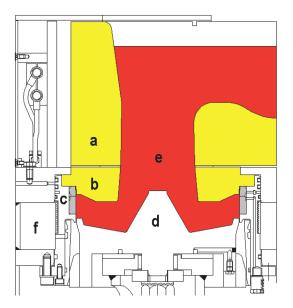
Bottom-mounted hot top mold crosssection: (a/b) launder/hot-top, (c) mold wall, (d) stool-cap (bottom block), (e) molten metal, (f) water chamber.
